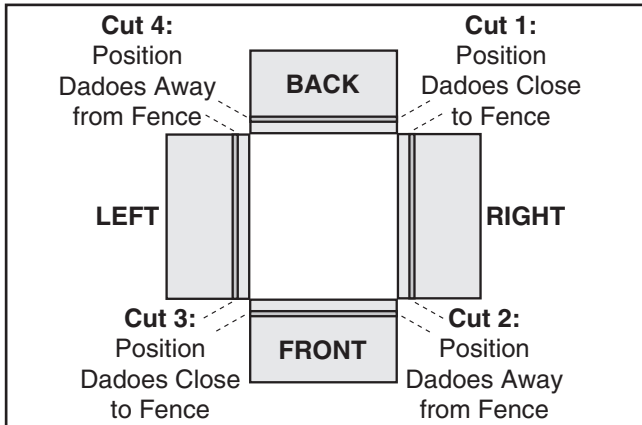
Drawer pieces laid out and marked inside face up; cutting order and workpiece position against fences also shown.
